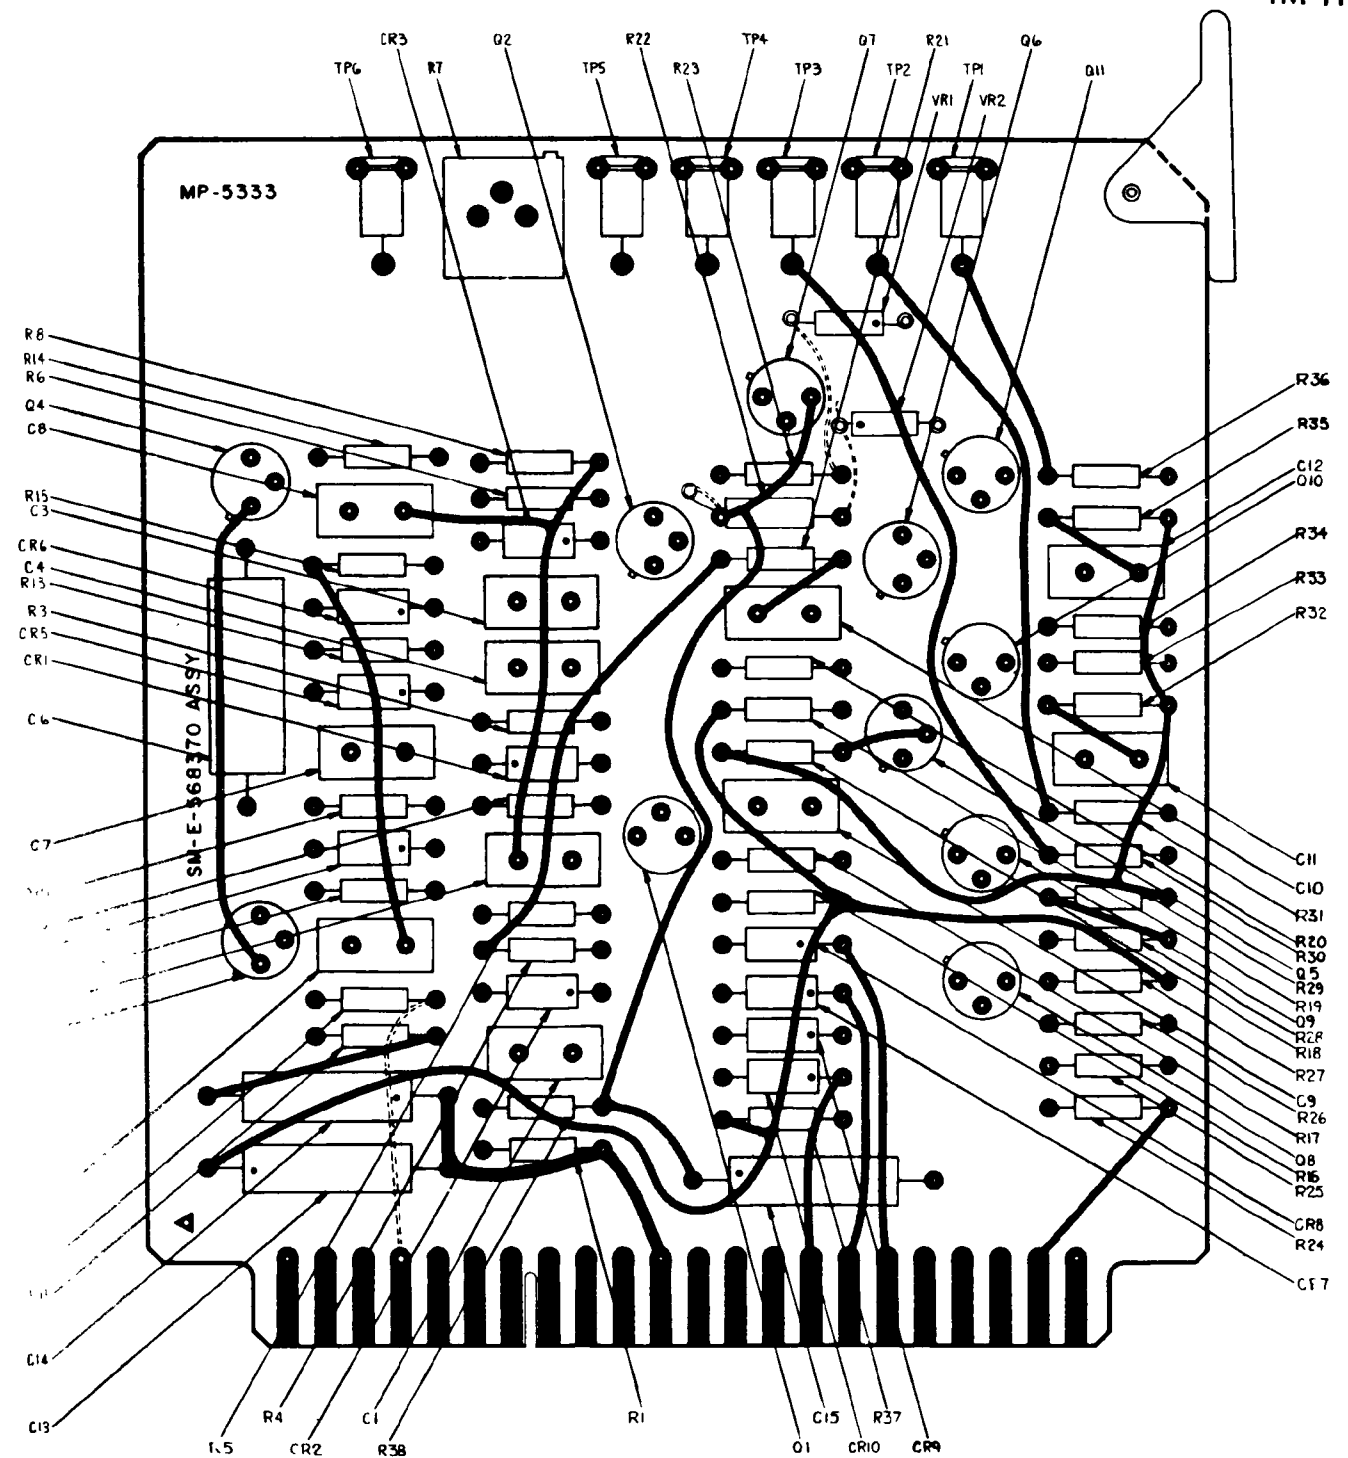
Decoder module A10, wiring diagram and parts location.
